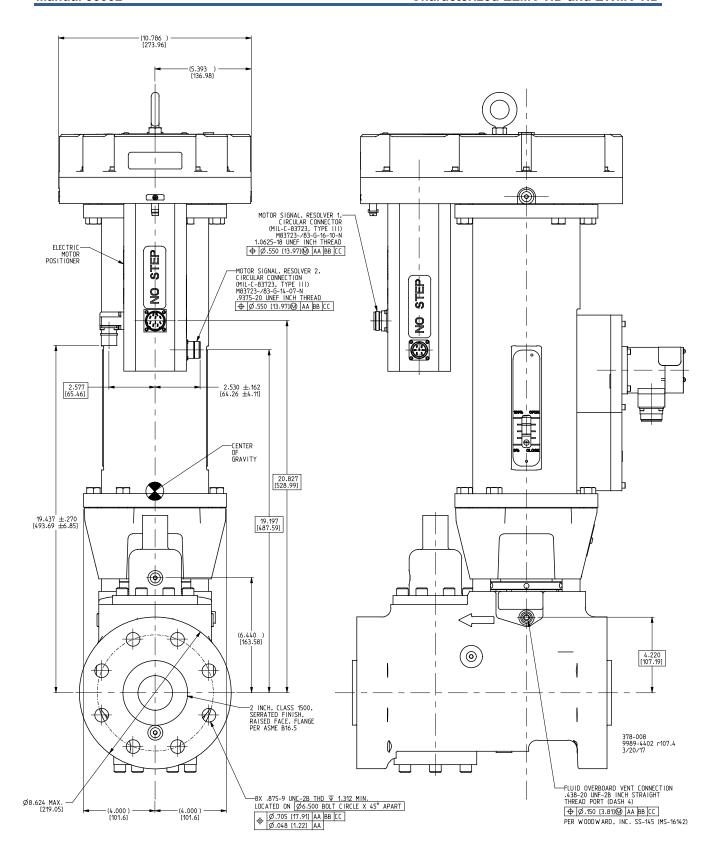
Outline drawing of 2" ELMV-HD and EWMV-HD
